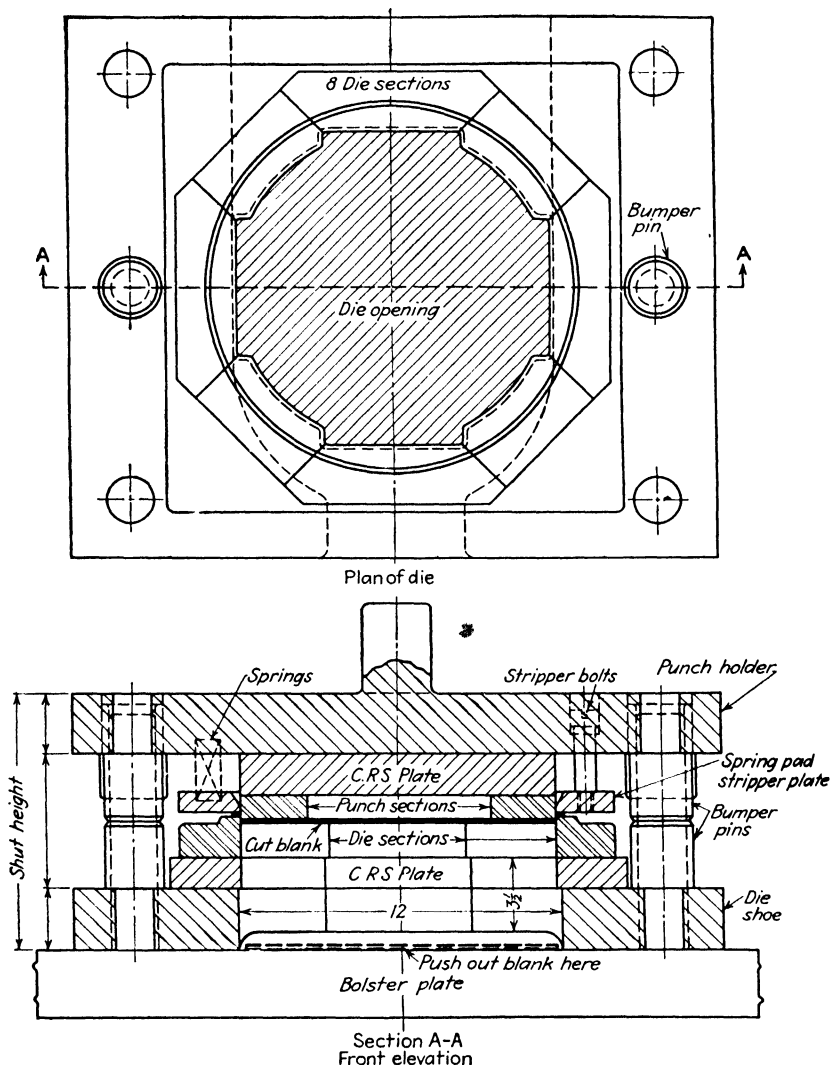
Plain blanking punch and die of built-up sections, illustrating a method for disposing of blanks that are too large to pass through the opening in the press bed. The blanks are cut through the die and fall on the surface of the bolster plate; the blanks are then pushed out through a clearance channel underneath the die shoe.
